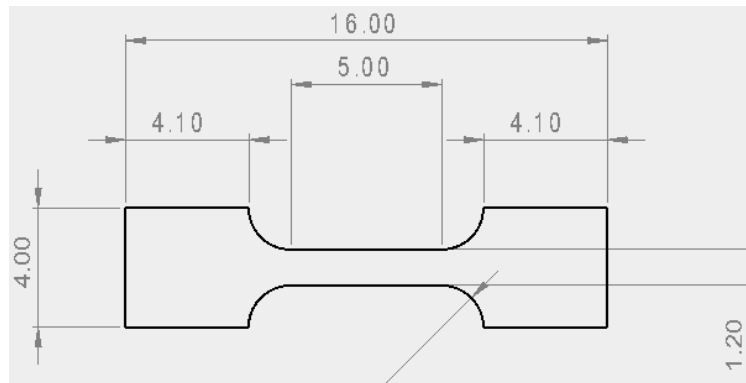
Schematic of SSJ tensile-testing sample geometry machining blueprint; dimensions in millimeters
